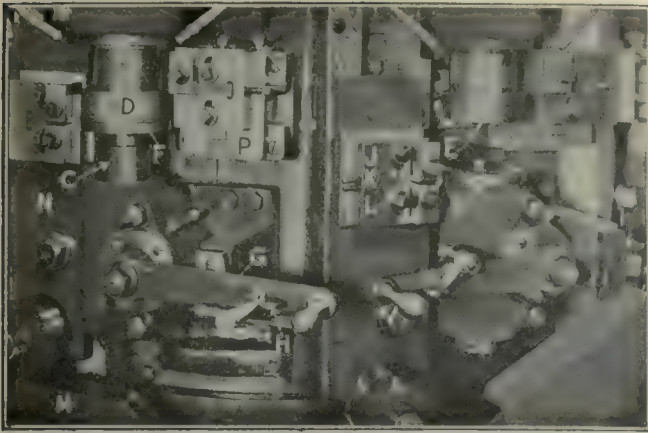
THE TOOL MECHANISM FOR TURNING AND FACING OPERATIONS
